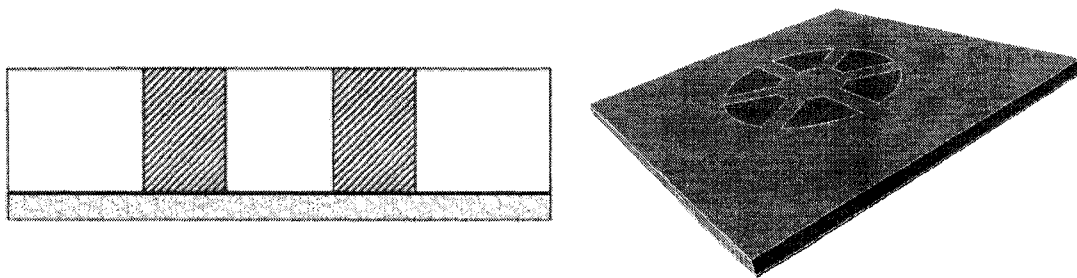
Rotor fabrication step 5 – removal of excess NdFeB by polishing.
